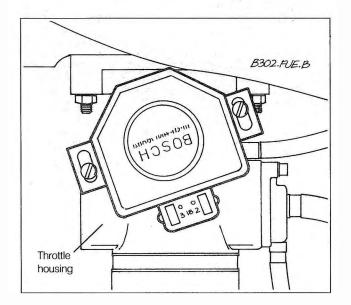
Throttle switch showing terminal identification. Throttle switch is mounted on the right-hand side of throttle housing.
